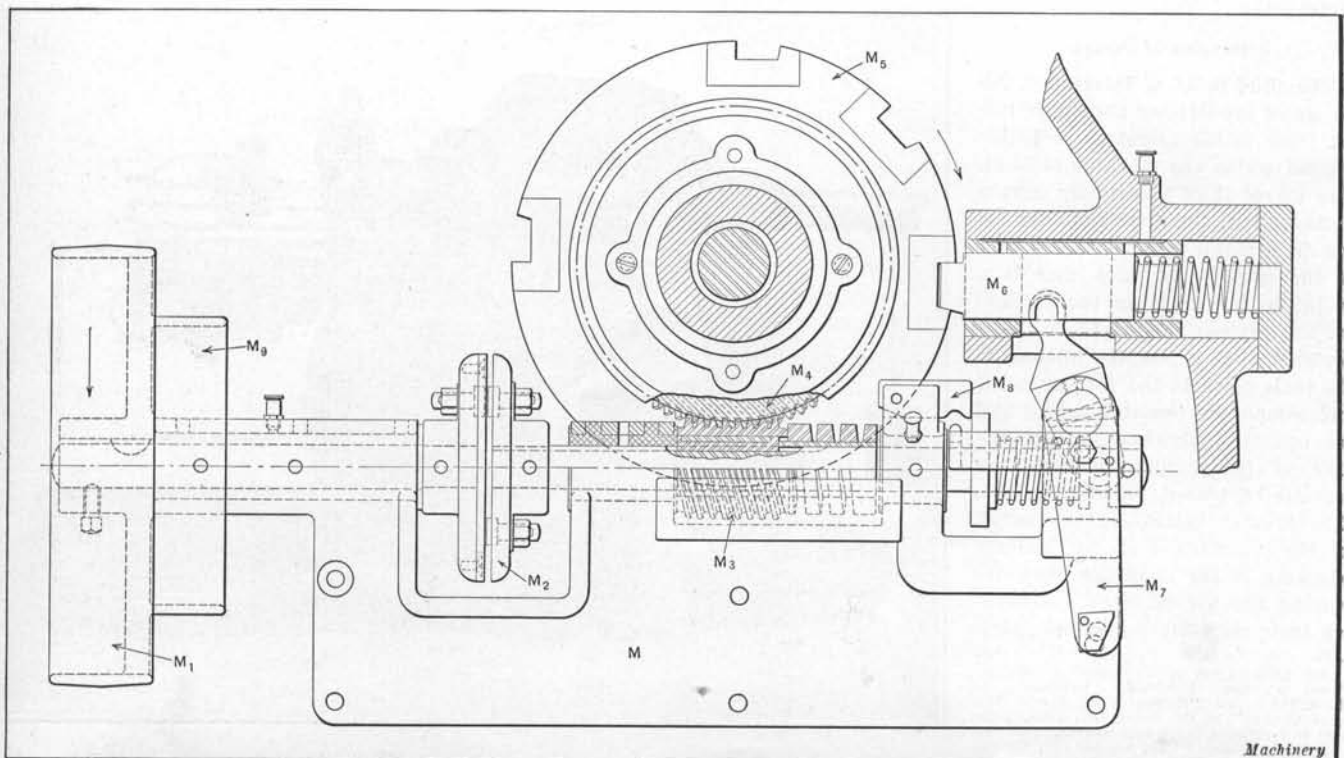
Sectional View, showing Revolving Mechanism for indexing Turret on Gridley Single-spindle Automatic Turret Lathe
